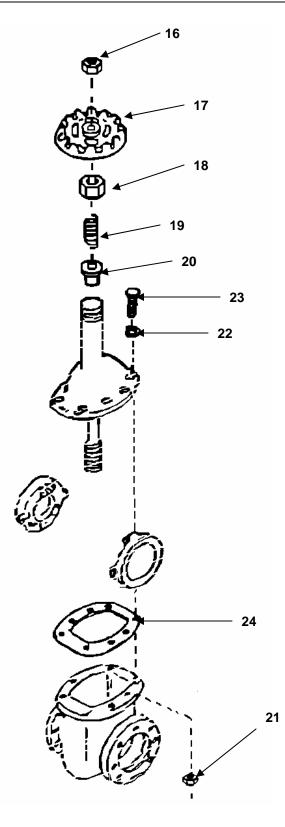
Gate Valve Assembly (Sheet 2 of 2)
